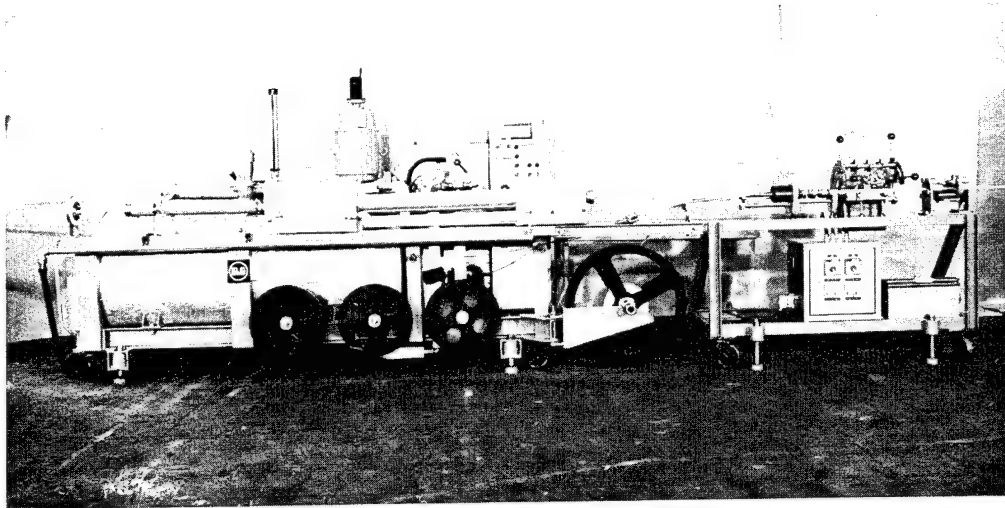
SIDE VIEW OF THE EQUIPMENT
